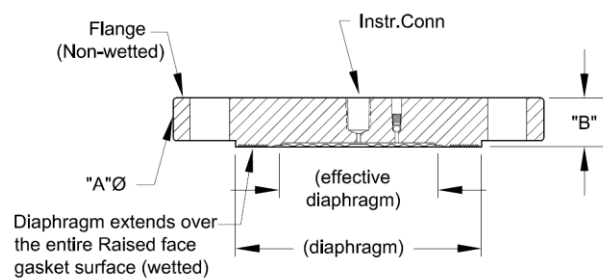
Approximate vertical mounting dimensions for Remote Seal Transmitter
